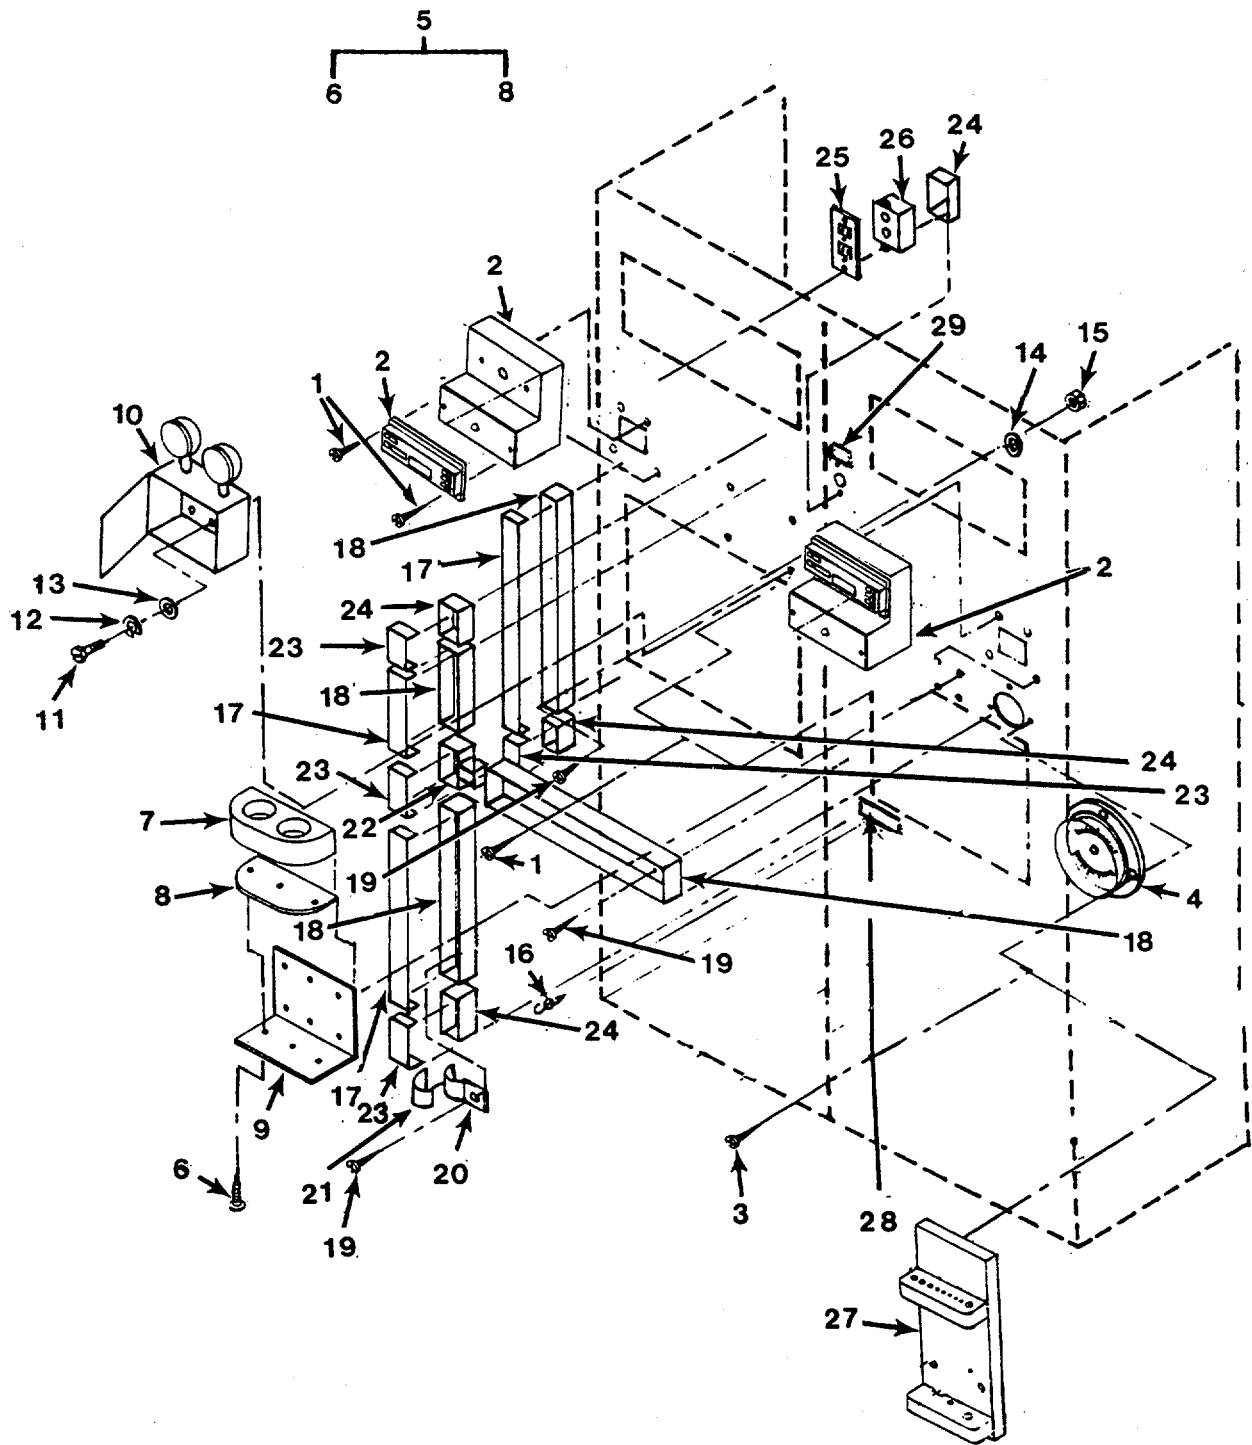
Air Conditioner Housing Equipment Mounting Installation
